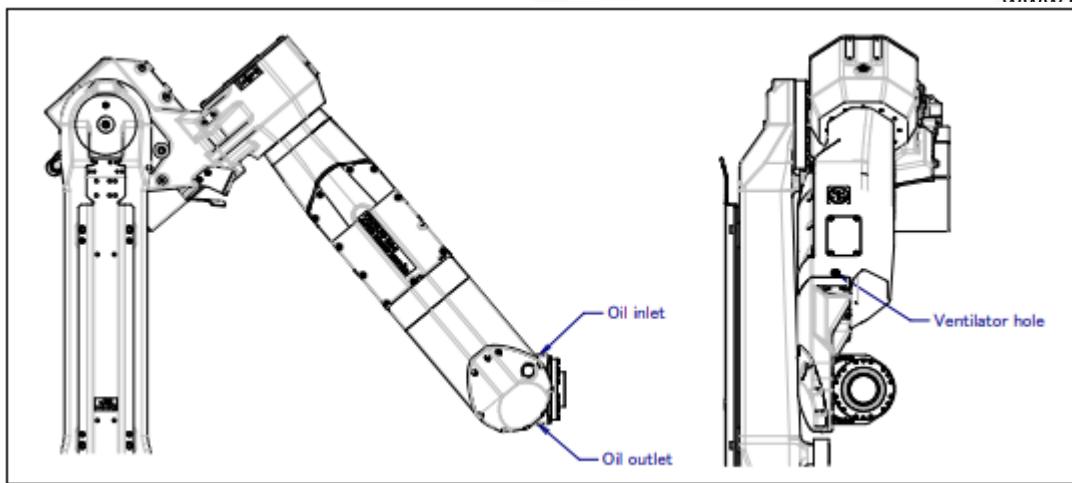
(b) Oil adapter (supply oil J5/J6-axis gearbox) (ARC Mate 120iC, M-20iA)
